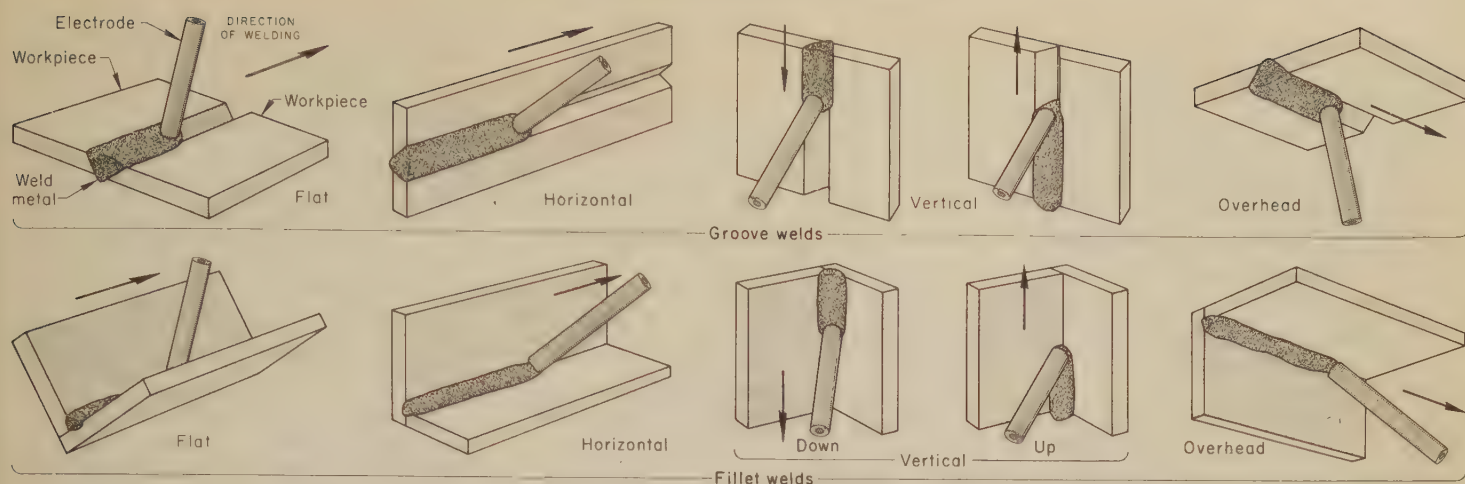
Usual welding positions, for making groove welds (top row) and fillet welds (bottom row)
